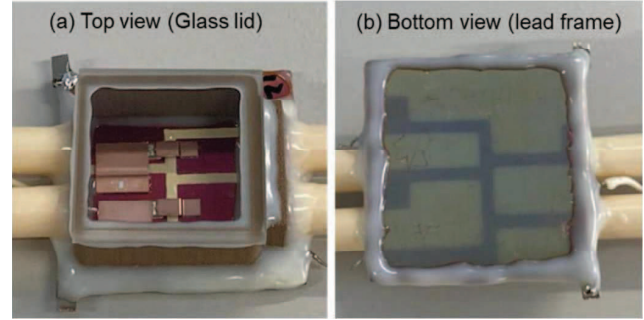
Photos of the fabricated test sample: (a) top view (from glass lid side) and (b) bottom view (from lead frame side)
